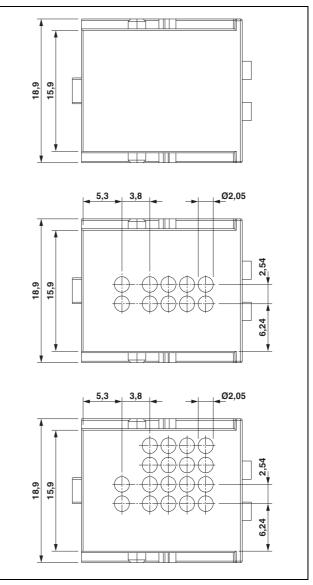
External dimensions of the ME-IO 18,8 C 2U MC... housing cover
